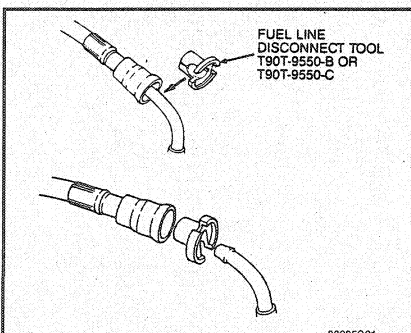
A fuel line disconnect tool is required to properly separate a duckbill clip fitting
